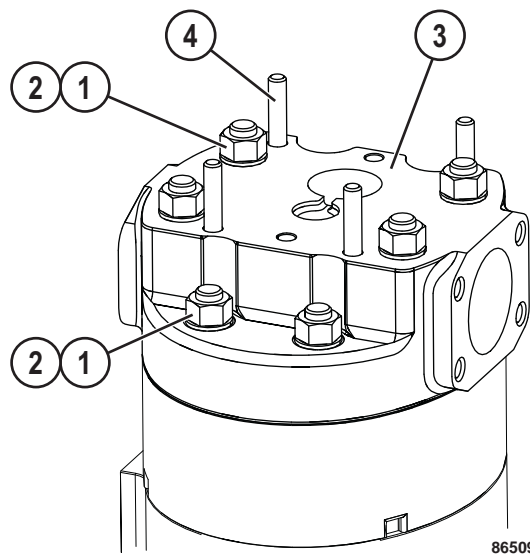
HOIST PUMP DISASSEMBLY & ASSEMBLY
